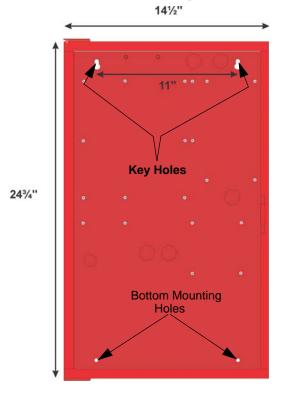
Cabinet Flush Mount Dimensions and Mounting Hole Locations
